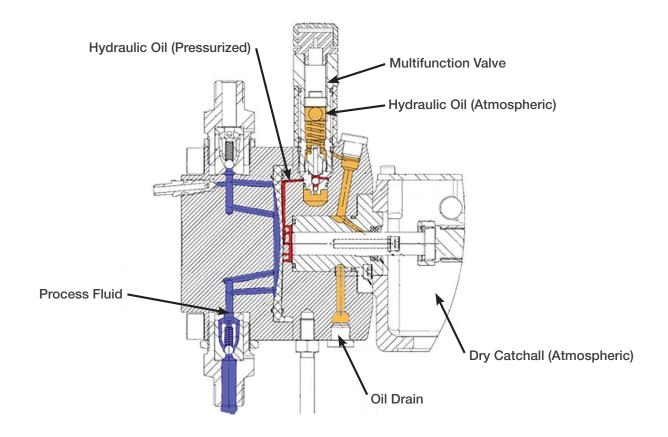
DSD liquid end cross-section on a Milton Roy MilRoyal D drive
